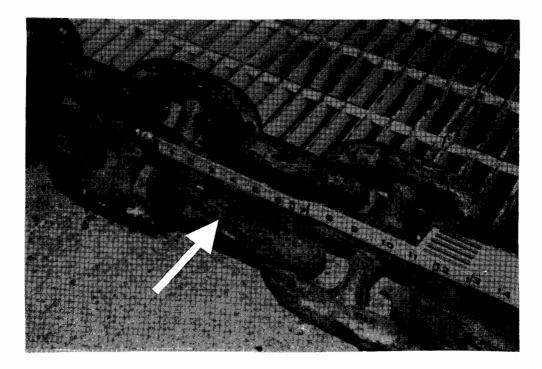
SAMPLE INSPECTION PHOTOGRAPH
